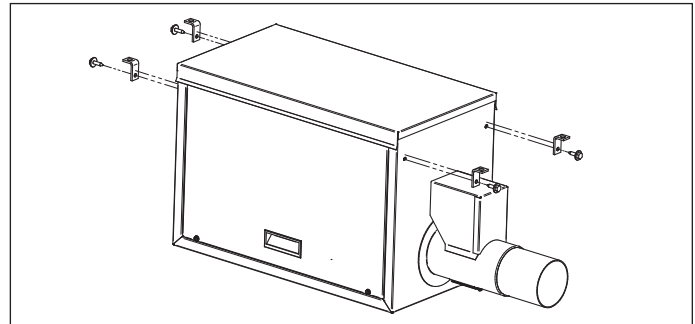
Insertion of Turbulator Baffle Assembly
